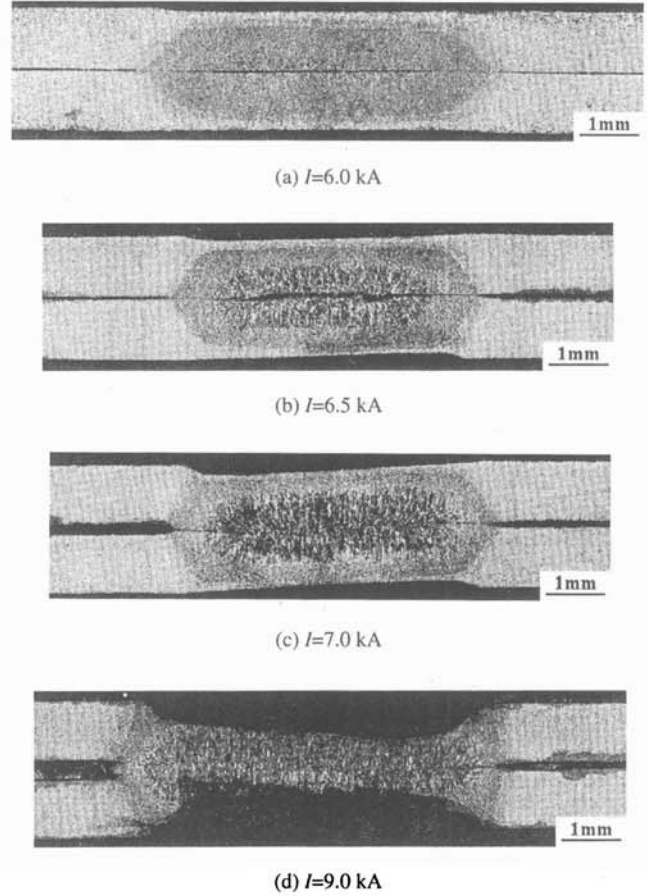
Macrostructures of welds in 0-100-100
